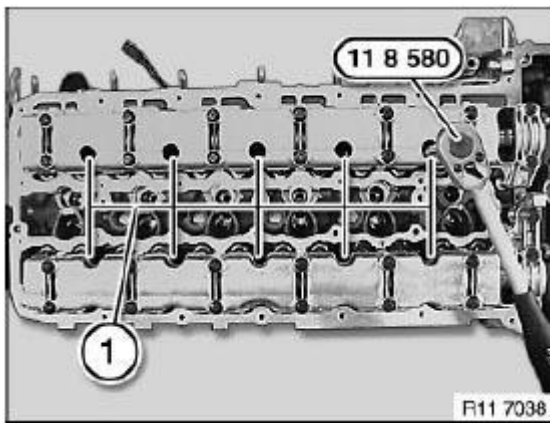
Removing M10 Cylinder Head Bolts With Special Tool 11 8 580
